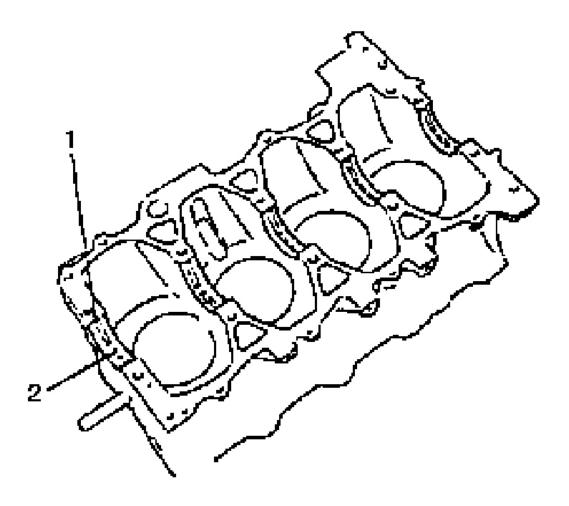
Identifying Main Bearing Courtesy of SUZUKI OF AMERICA CORP.
